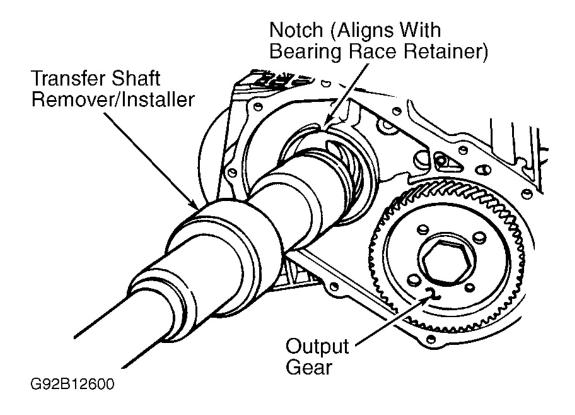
Removing & Installing Transfer Shaft Courtesy of CHRYSLER CORP.
